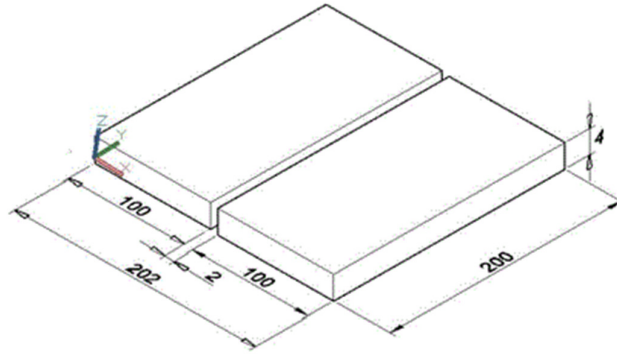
Butt joint design for two sheets all dimensions in mm.
